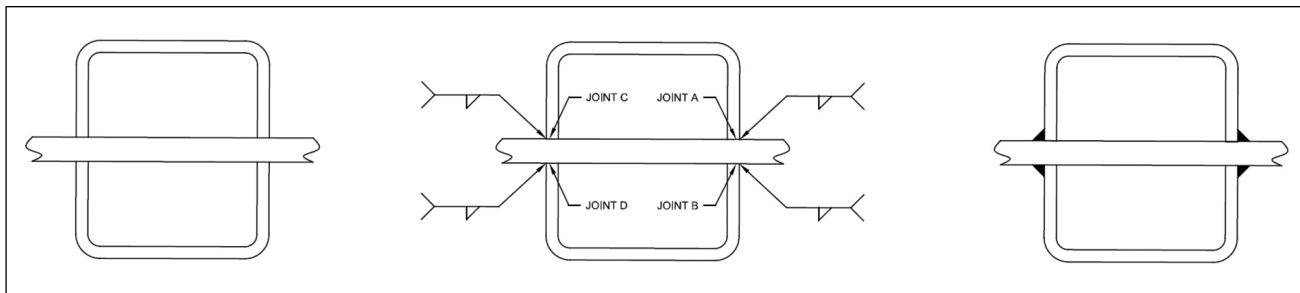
Slotted tube and plate with welding symbols for each joint.
